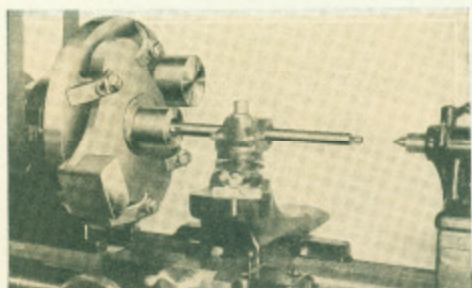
Machining Work of Large Diameter and Irregular Shape Mounted on Face Plate
